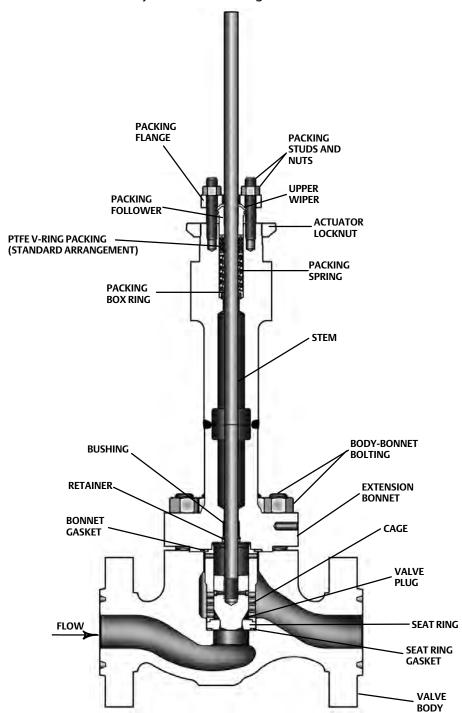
Fisher HPT-C Valve Assembly Detail with Fabricated Extension Bonnet NPS 8 through 12 (Long)
